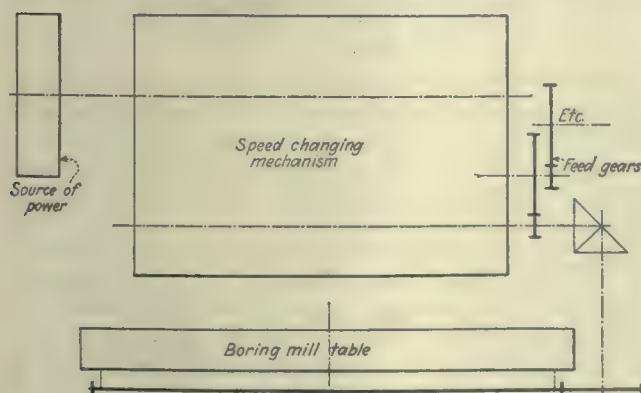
DIAGRAM SHOWING ARRANGEMENT OF BORING MILL GEARS
